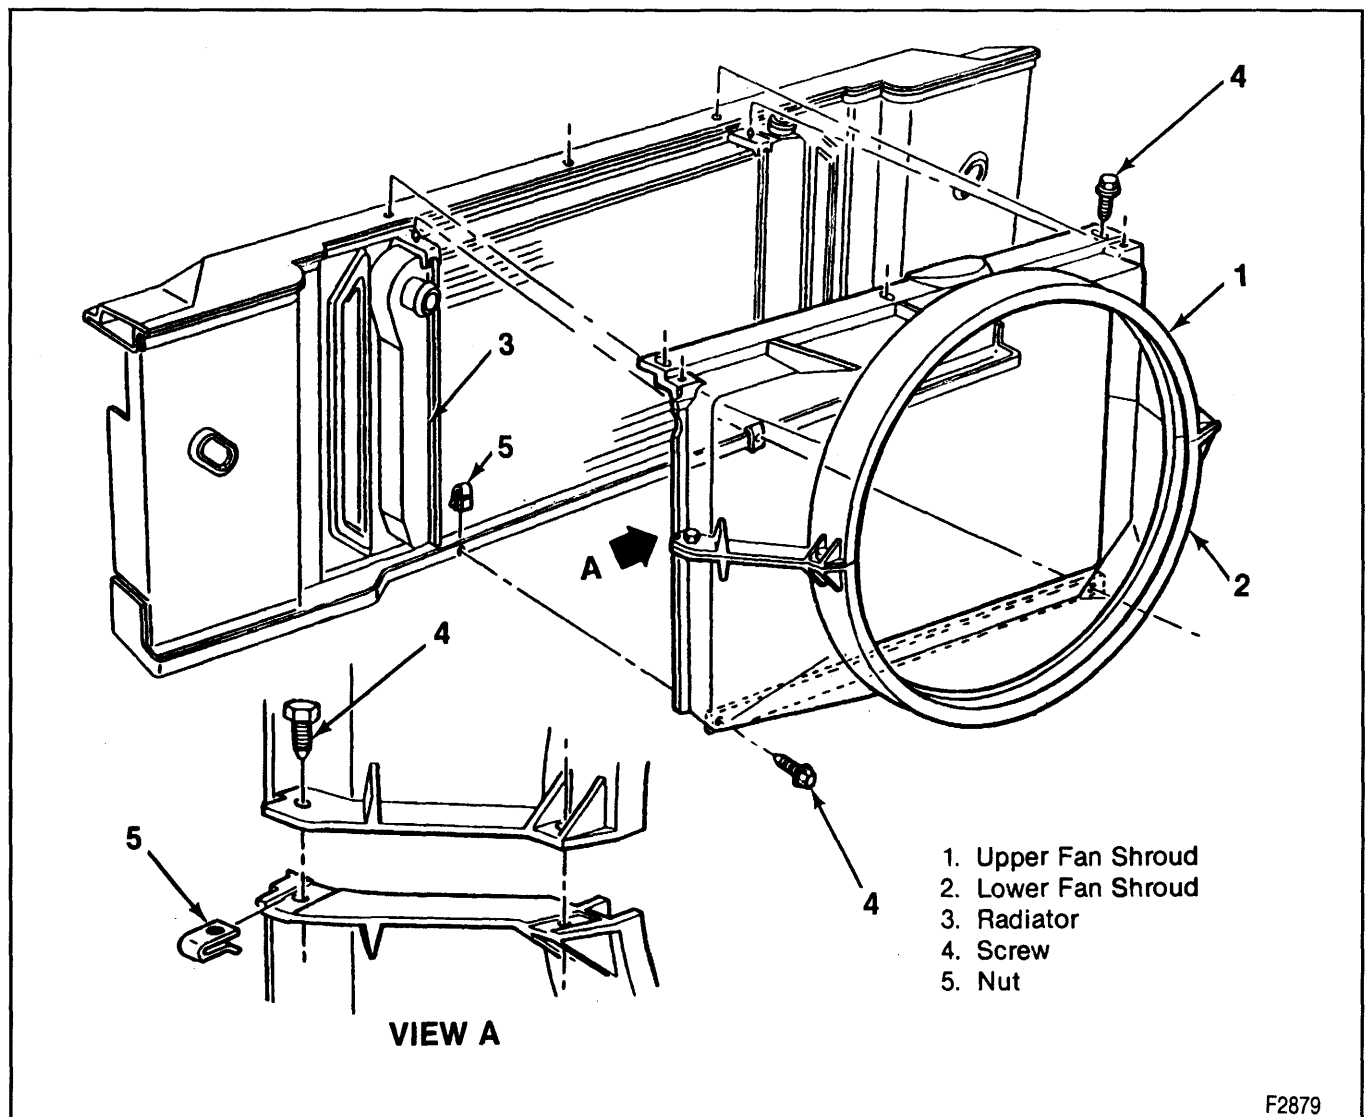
Fan Shroud and Components (4.3L, 5.0L and 5.7L Engines)
